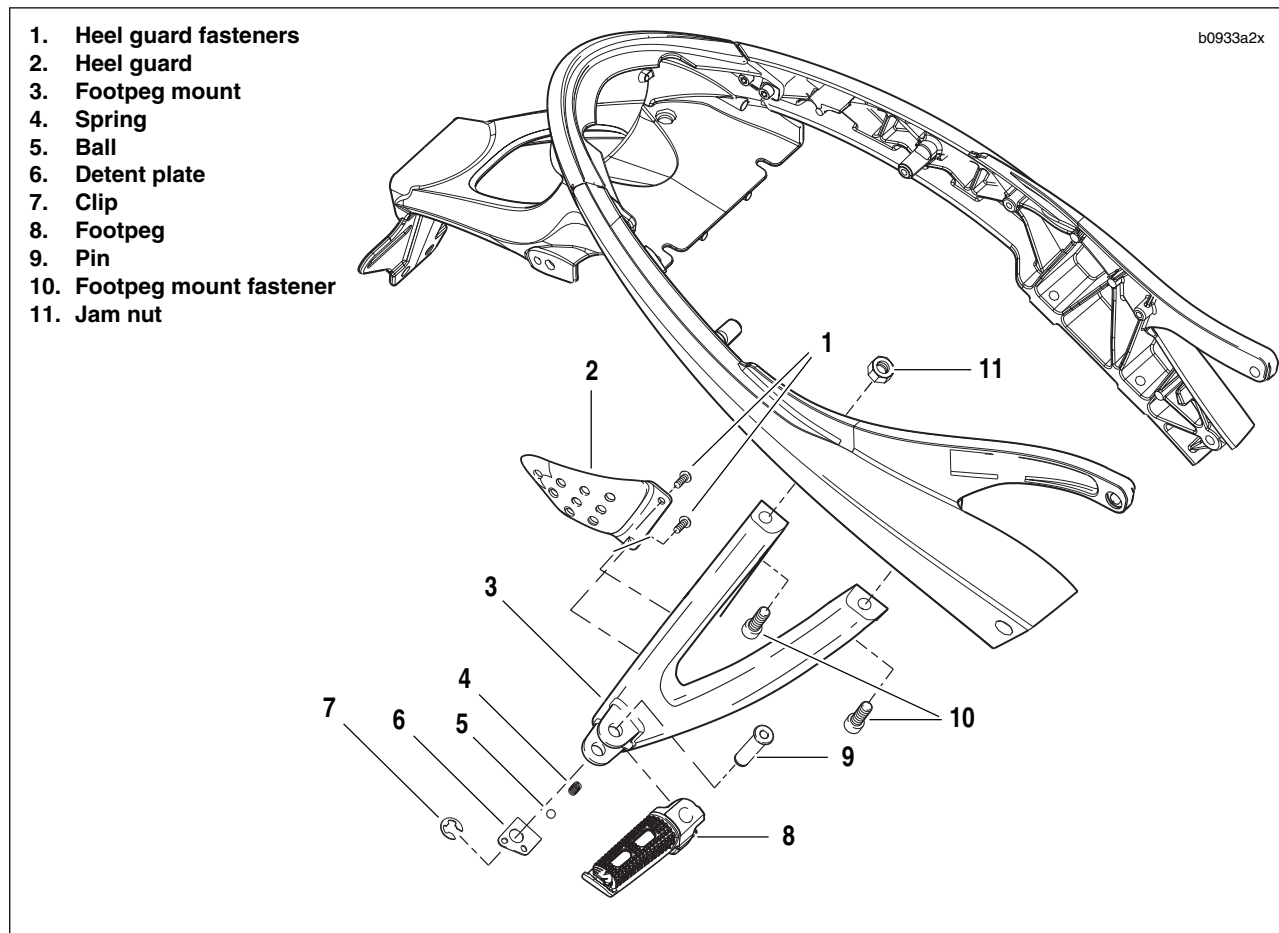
Passenger Footpeg, Mount and Heel Guard Assembly
